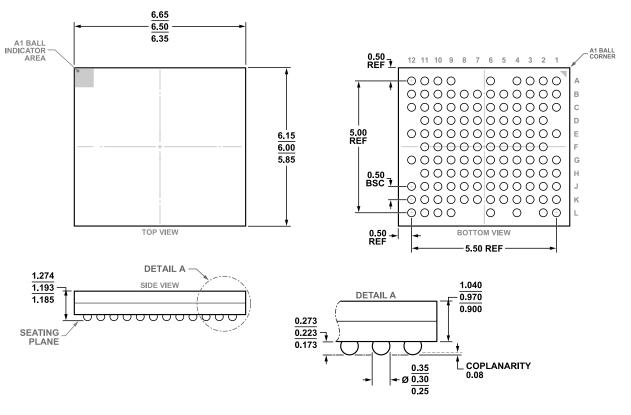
120-Ball Chip Scale Package Ball Grid Array [CSP_BGA], (BC-120-4) Dimensions Shown in Millimeters
